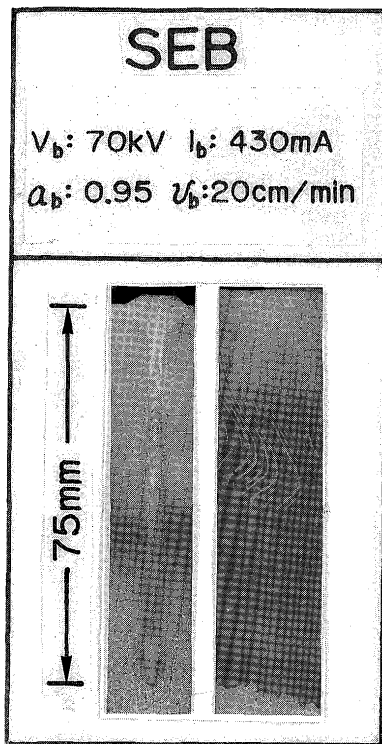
Longitudinal and cross sections of SEB welding bead
